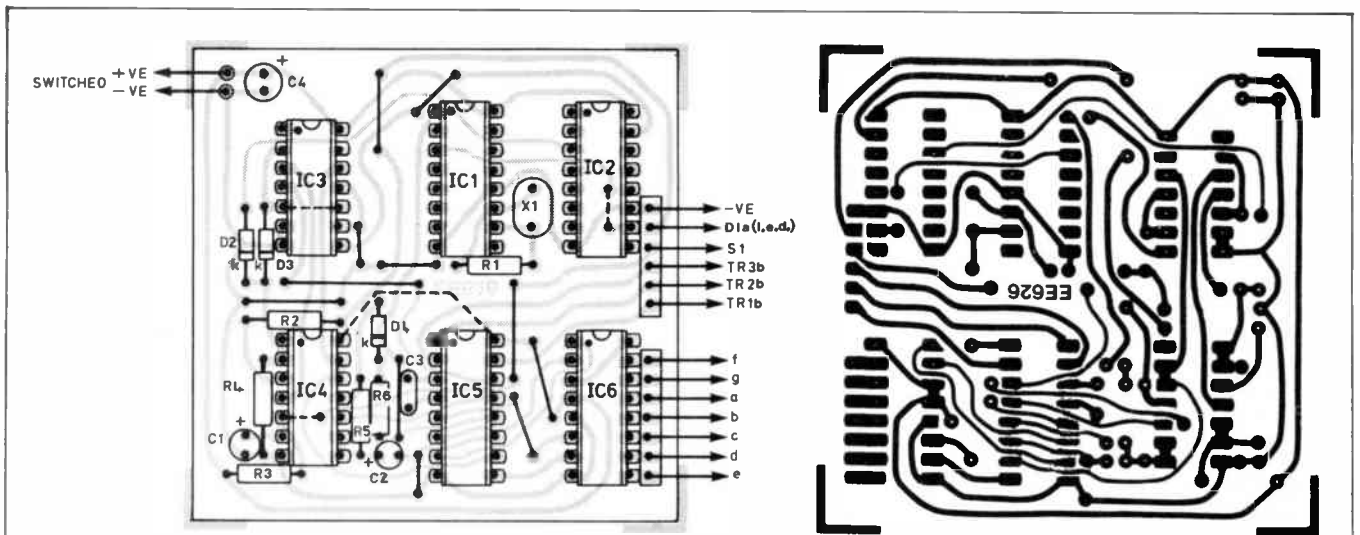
Main printed circuit board component layout and full size copper foil master pattern.
